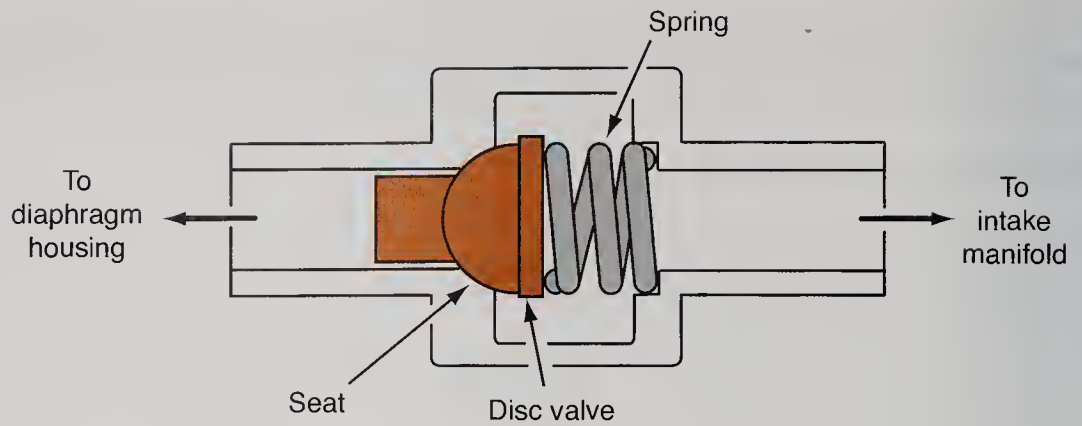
This cutaway view shows the parts of a typical vacuum check valve.
